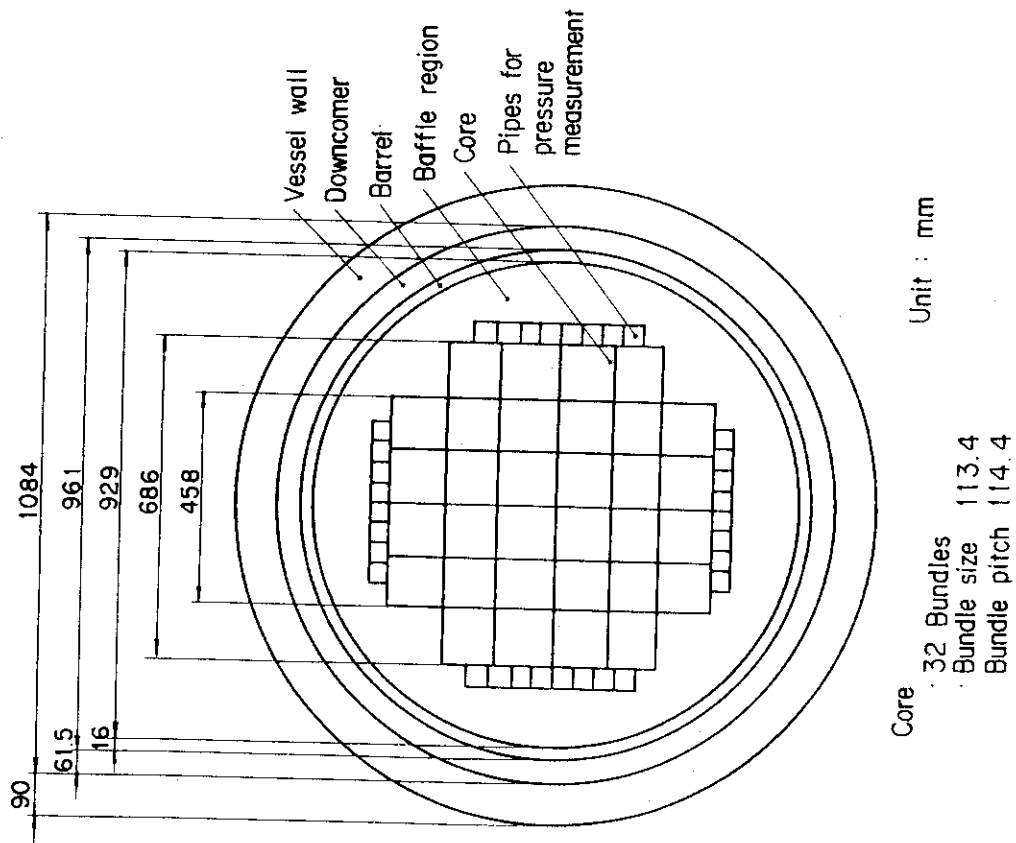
Dimension of CCTF Core-II pressure vessel cross section
